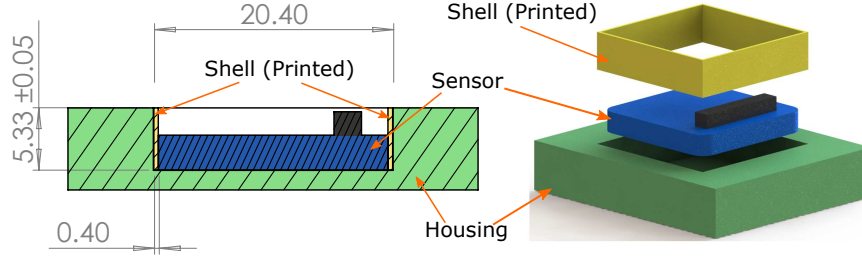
Technical drawing of the assembly of the square shell geometry (left), and the exploded view of the assembly (right). The conceptual sensor that fits inside the shell and the housing. A cross-sectional view is shown in the figure and the assembly is symmetric about the axis of the cross-sectional cut.
